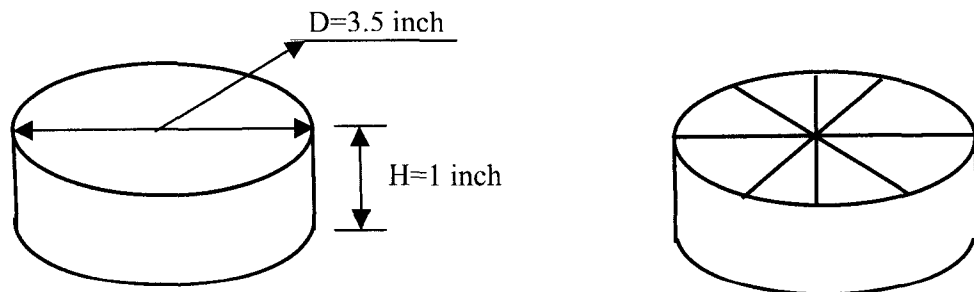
Crankshaft Journal Sample and Pie-shaped samples cut from Crankshaft Journal
